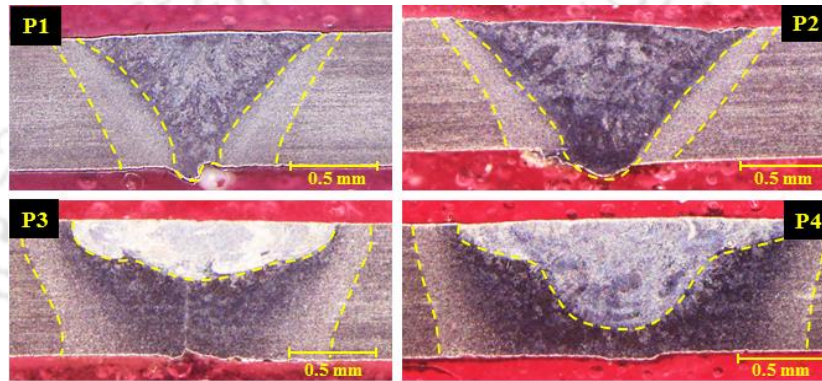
Weld pool shape at pulse welding conditions.
